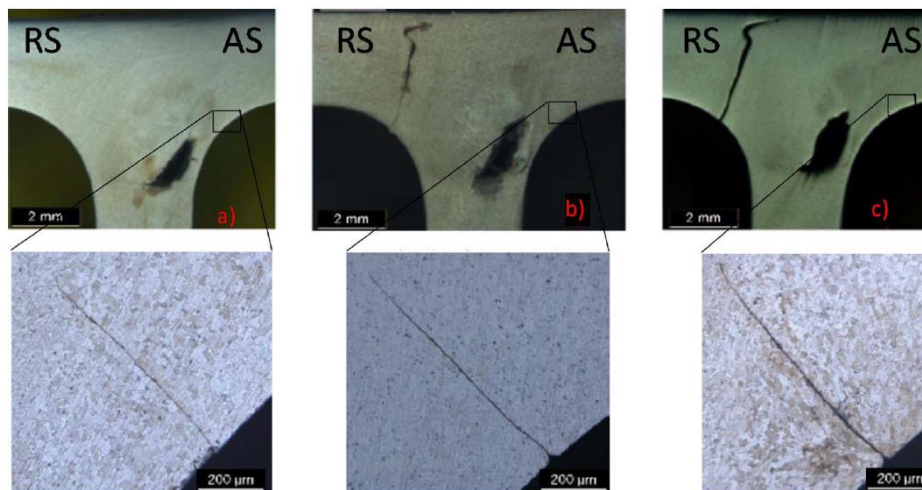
Morphology of the AA 5083-H111 T-butt welds: a) BP5-1; b) BP5-2; c) BP5-3. RS-retreating side; AS-advancing side.
